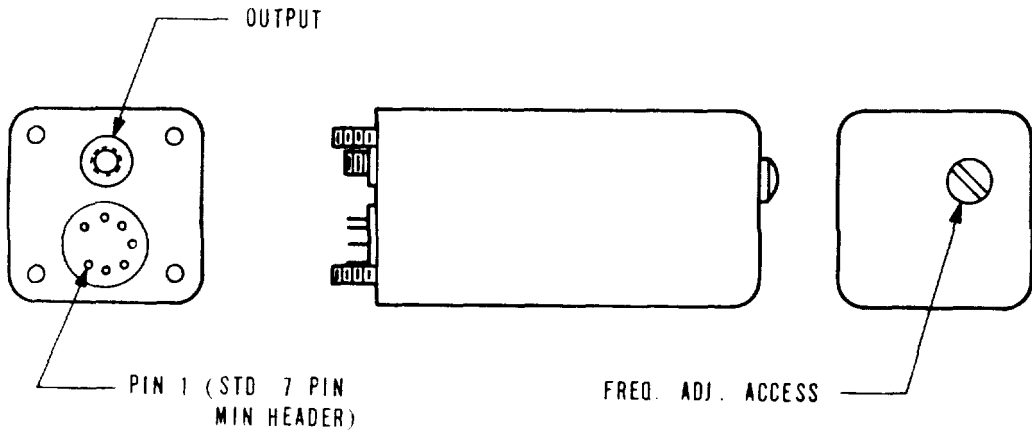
Top View, Test Oscillator Assembly, SG,-100/flr-9(V),
